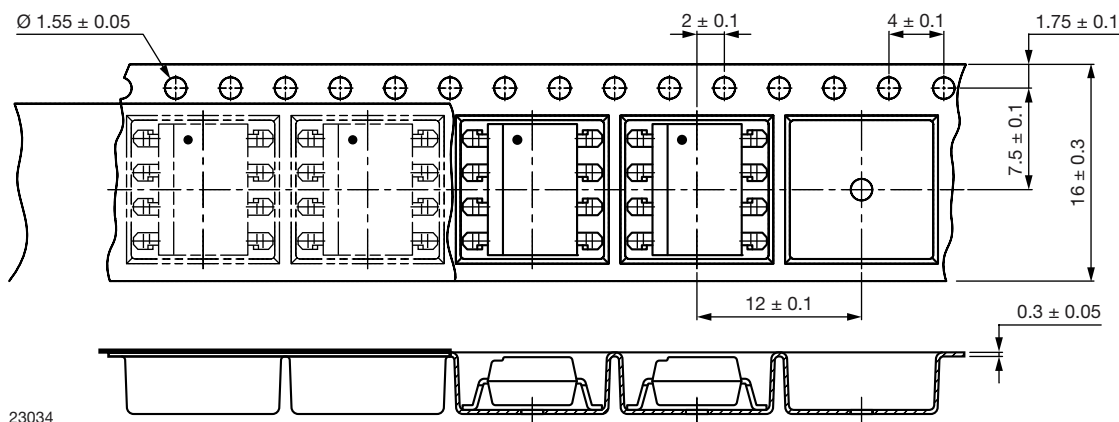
Tape and Reel Packaging (1000 pieces on reel)
